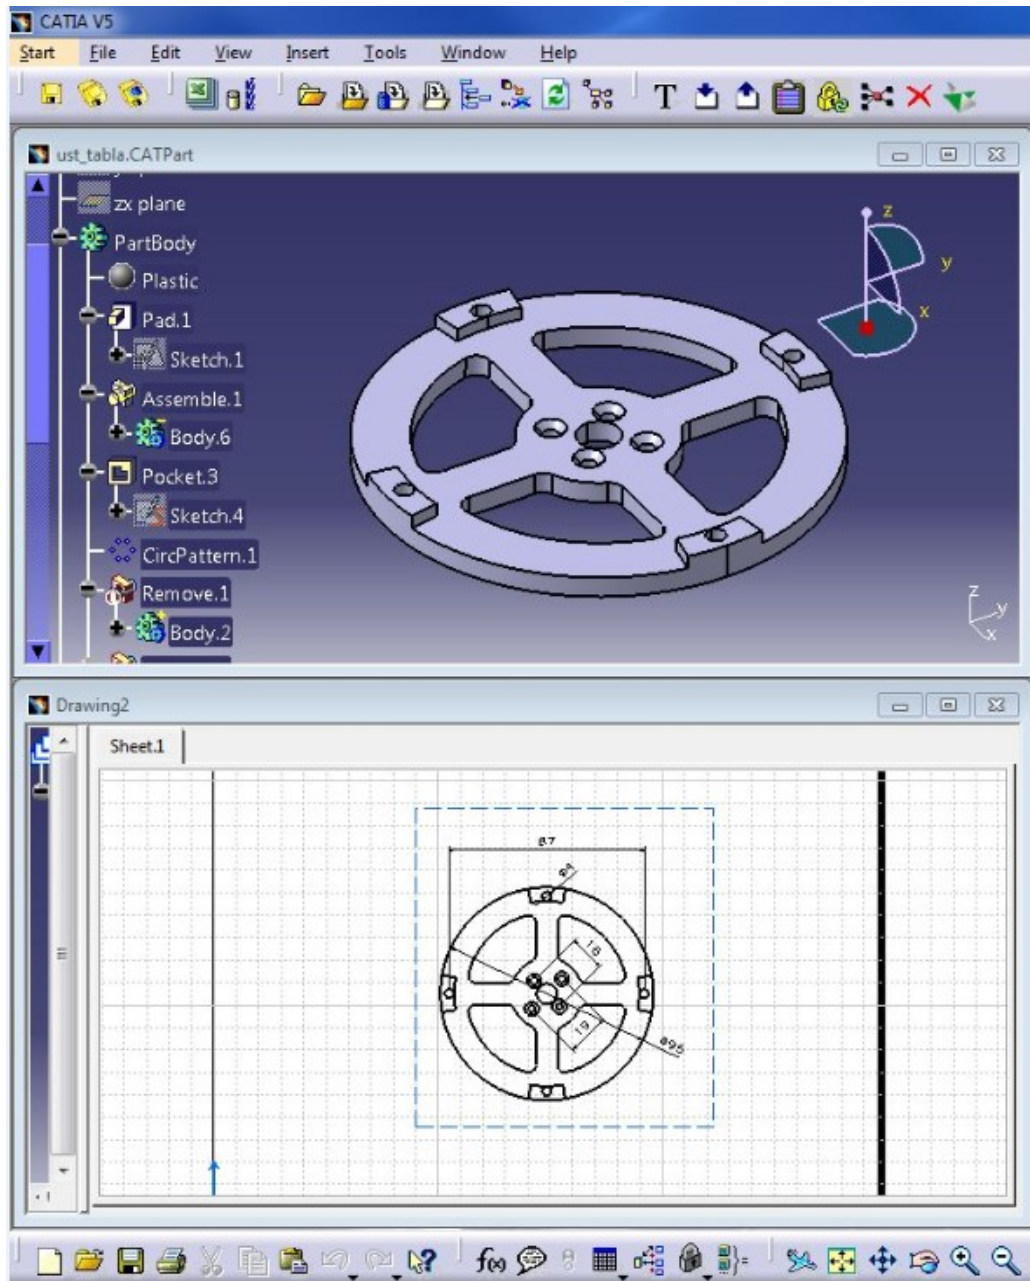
Part 1: Adaptor part to fit electrical motor to the actuator is designed.
